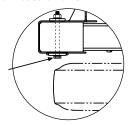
Alternative installation of the QUIK-ALIGN pivot bolt
